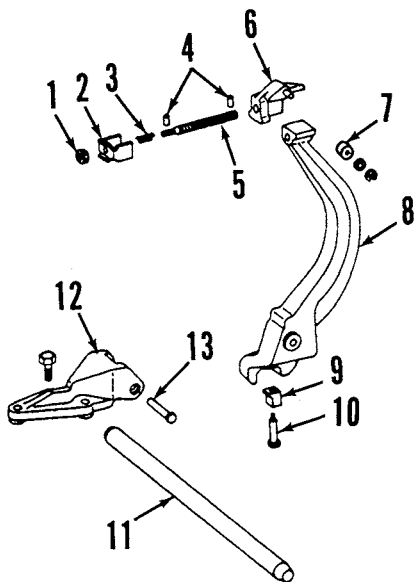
Typical load control arm and associated parts used on 4050, 4250 and 4450 models equipped with Quad-Range transmission.
